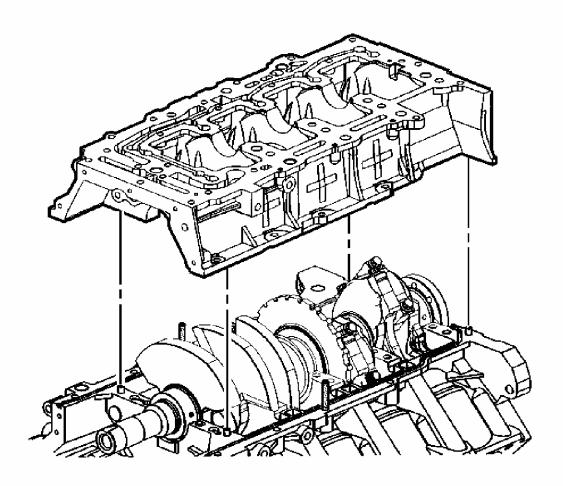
View Of Lower Crankcase Courtesy of GENERAL MOTORS CORP.
